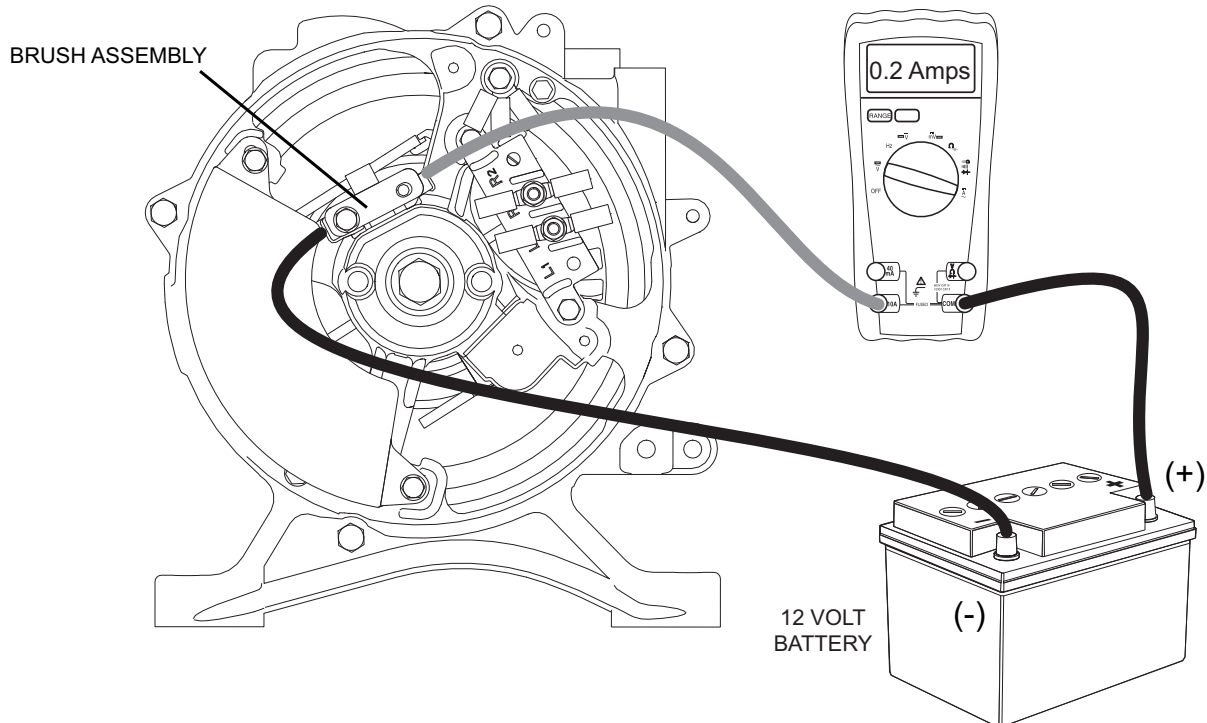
Jumper Wire and DMM Between Battery and Brush Assembly
